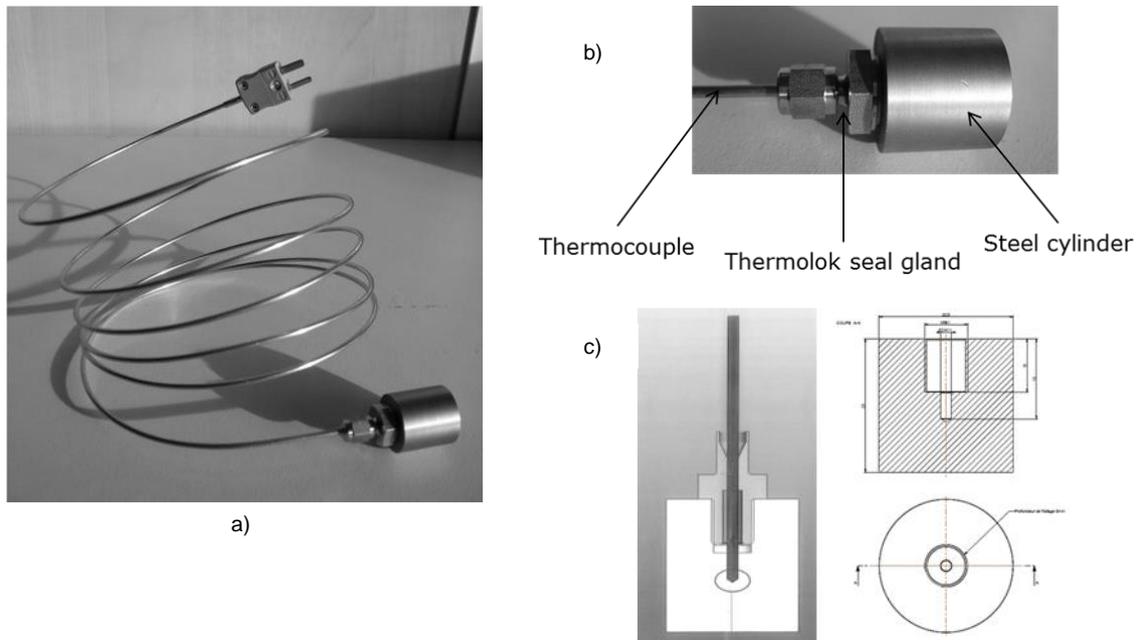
First prototype design : a) full system, b) sensor part, c) CAD file (courtesy of NEXTER, France)
